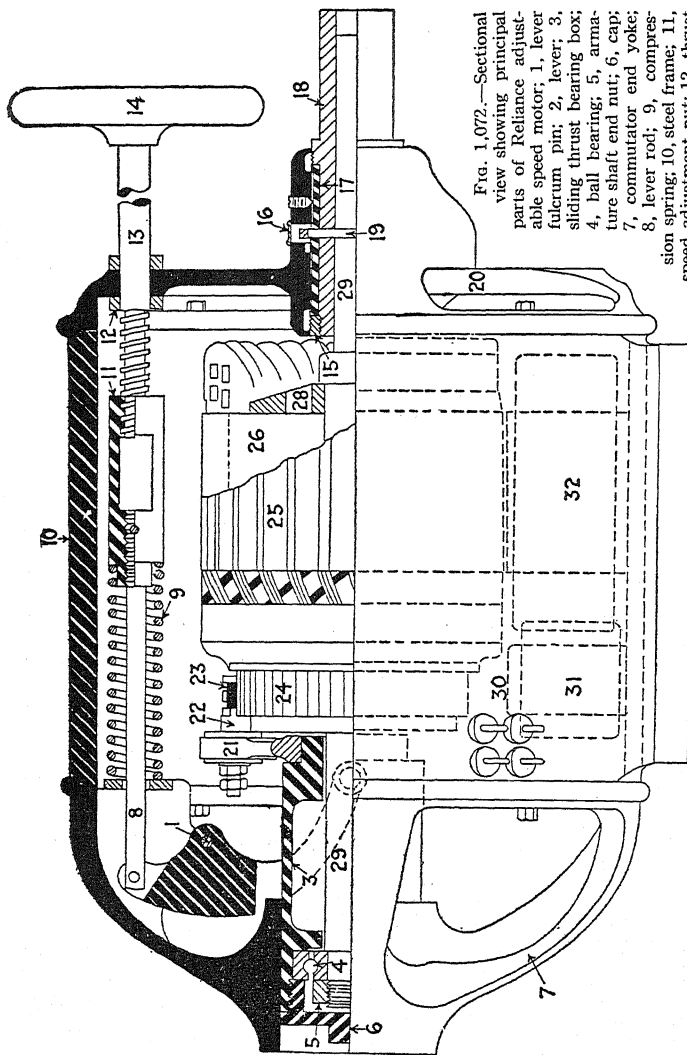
,072.—Sectional view showing principal parts of Reliance adjustable speed motor; 1, lever fulcrum pin; 2, lever; 3, sliding thrust bearing box; 4, ball bearing; 5, armature shaft end nut; 6, cap; 7, commutator end yoke; 8, lever rod; 9, compression spring; 10, steel frame; 11, speed adjustment nut; 12, thrust collars and pins; 13, handwheel rod; 14, hand wheel; 15, sleeve nut; 16, oil well cover; 17, bearing bushing; 18, sleeve; 19, oil ring; 20, pinton end yoke; 21, rocker arm; 22, brush holder stud; 23, brush; 24, commutator; 25, armature; 26, armature laminations; 27, armature coils; 28, armature end plate; 29, armature shaft; 30, leads; 31, axial position of commutating pole; 32, axial position of main field pole.
